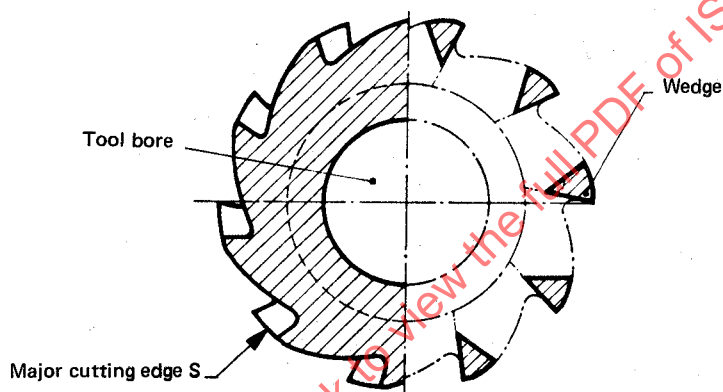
Cutting edges and surfaces on the cutting part of a shell end mill
